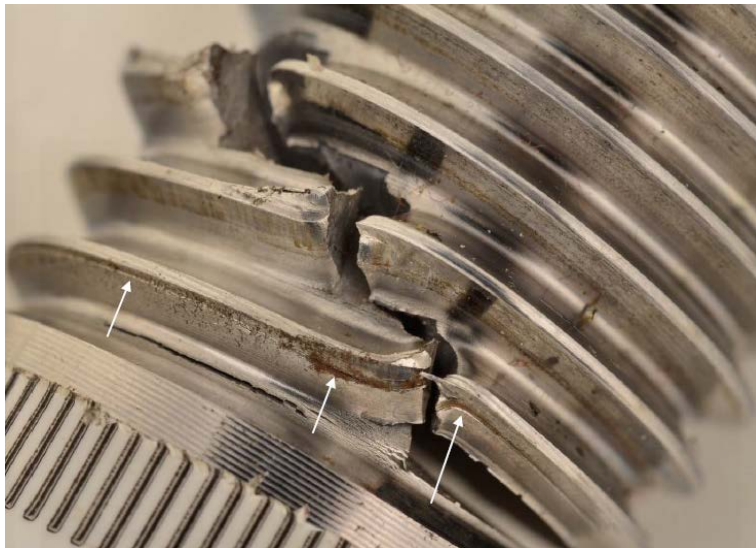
1 in. Bolt,1-D-M-U-7 Showing an Imperfection
